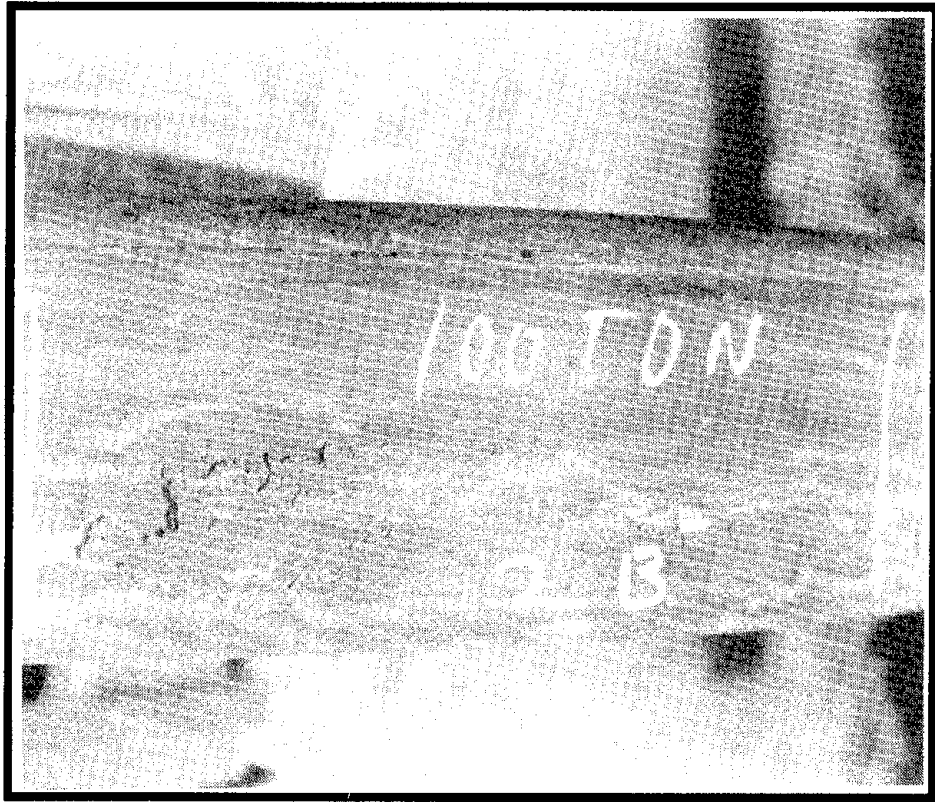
Wheel Tread Build-up Defect -- Left Wheel
